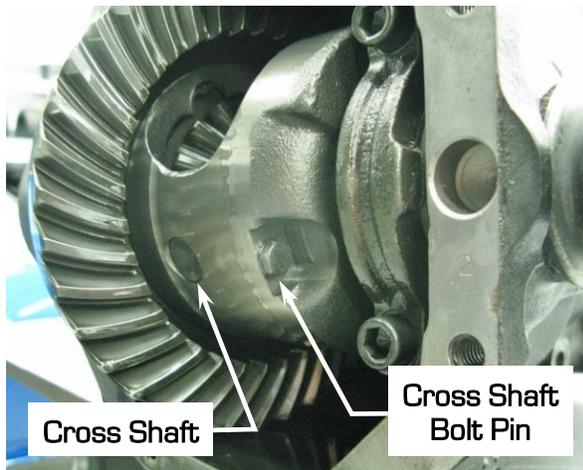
Cross Shaft & Cross Shaft Bolt Pin
